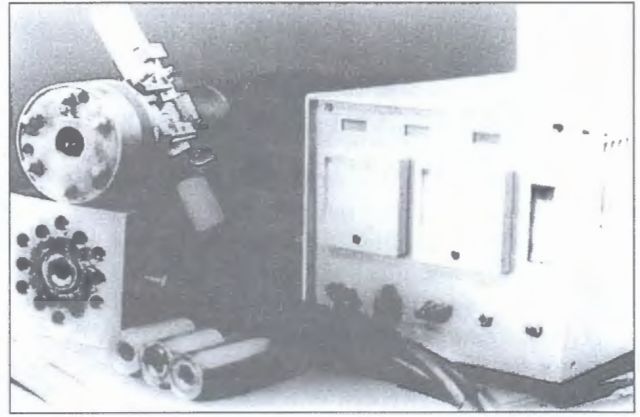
Automatic machine «Kometa-M» for welding tubes to tube plates by immersed arc
